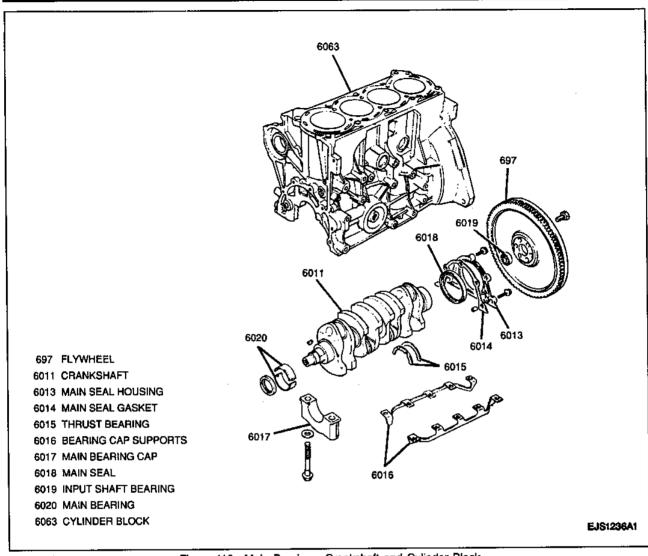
Main Bearings, Crankshaft and Cylinder Block
